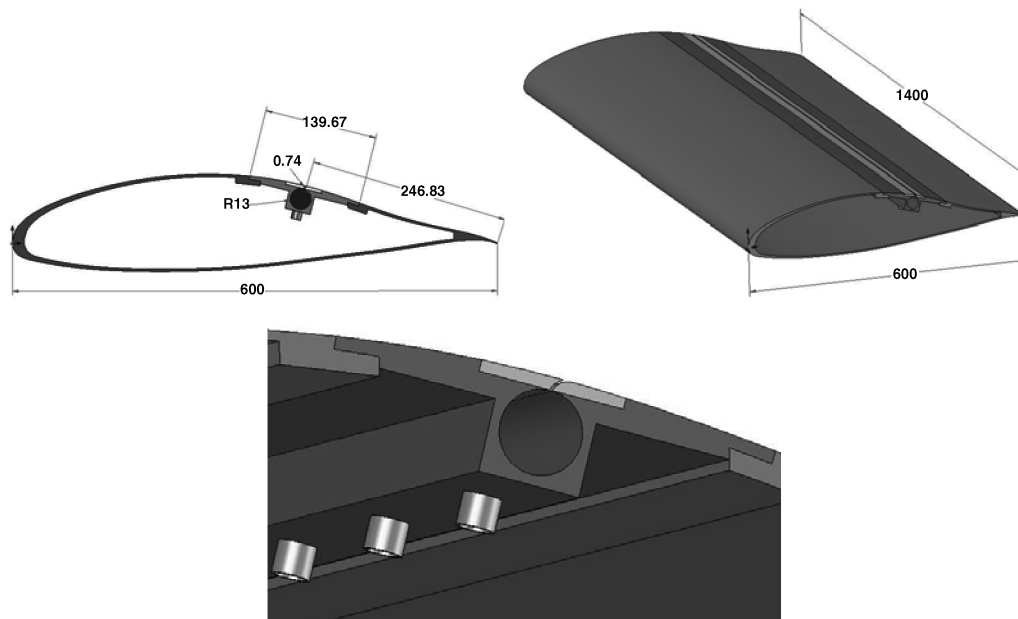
Design of the model (measurements in mm): a) wing section; b) wing design, global view; and c) wing design, chambers section.
